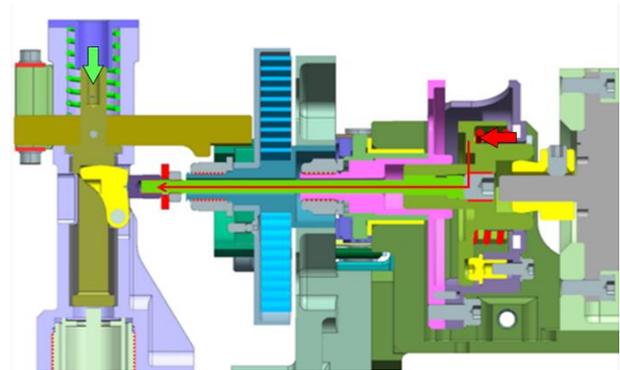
Initial configuration during emergency opening. The solid arrow indicates the load path
